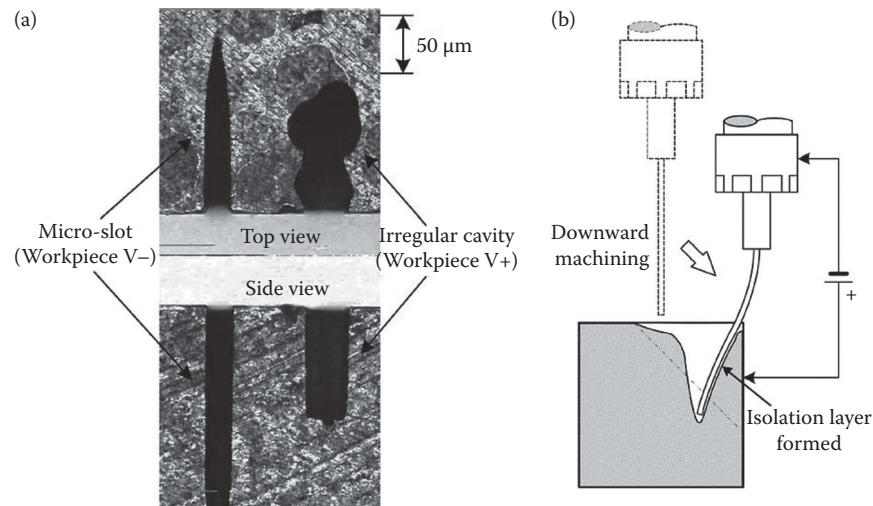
Failure of micro-slot machining in aluminum using micro-EDM with workpiece as positive polarity due to the formation of thin insulating oxide film. (a) Failure of micro-slot machining; (b) deflection of electrode in downward machining (workpiece positive)
